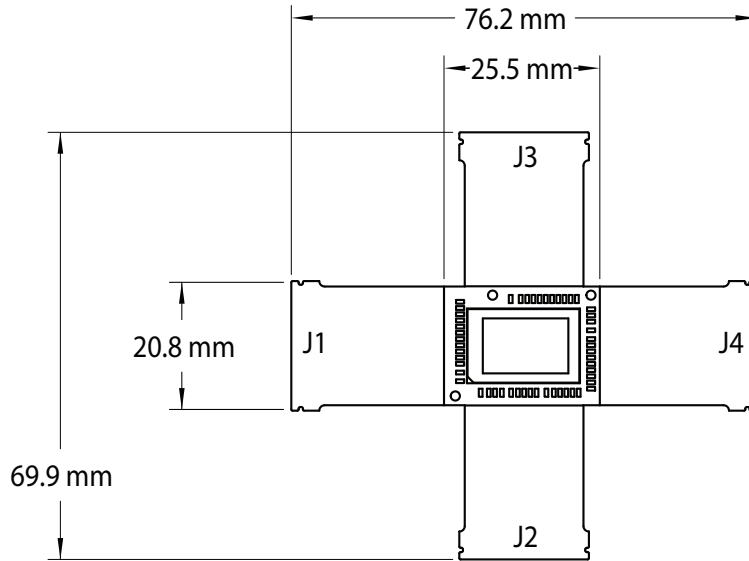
Dimensions of a W4631A interposer (TOP VIEW)
